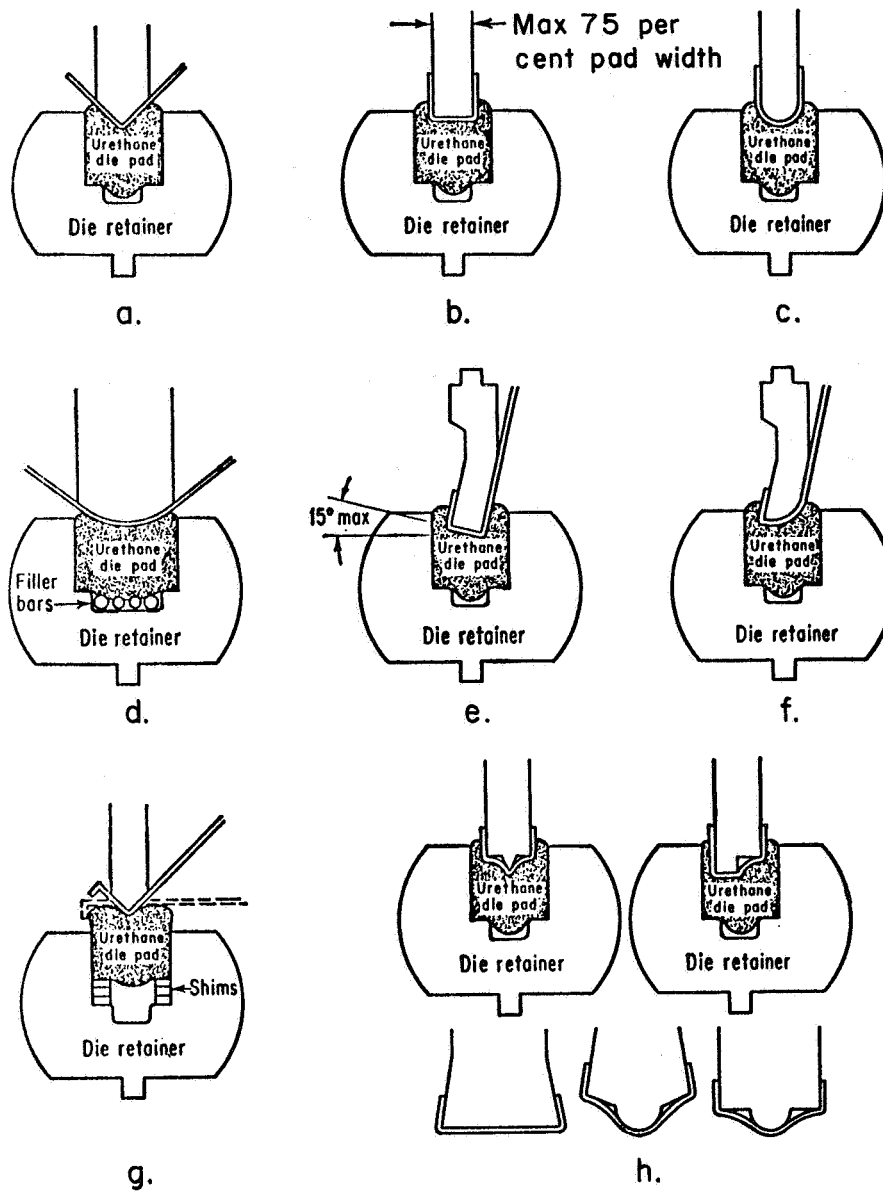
PRESS-BRAKE DIES USING URETHANE AS THE LOWER DIE (REF. 44)
